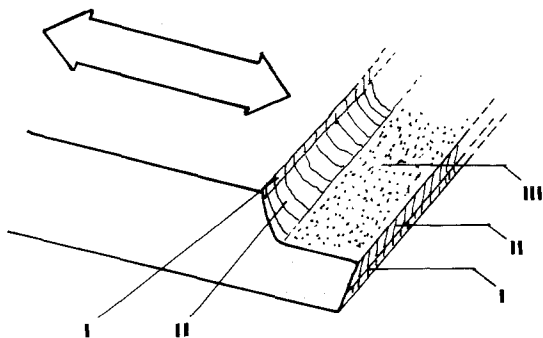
A schematic illustration of the fracture surface of the injection-moulded test piece. The direction of tensile stress is shown by the arrow. The different fracture zones are indicated by numbers I, II and III (cf. text).
